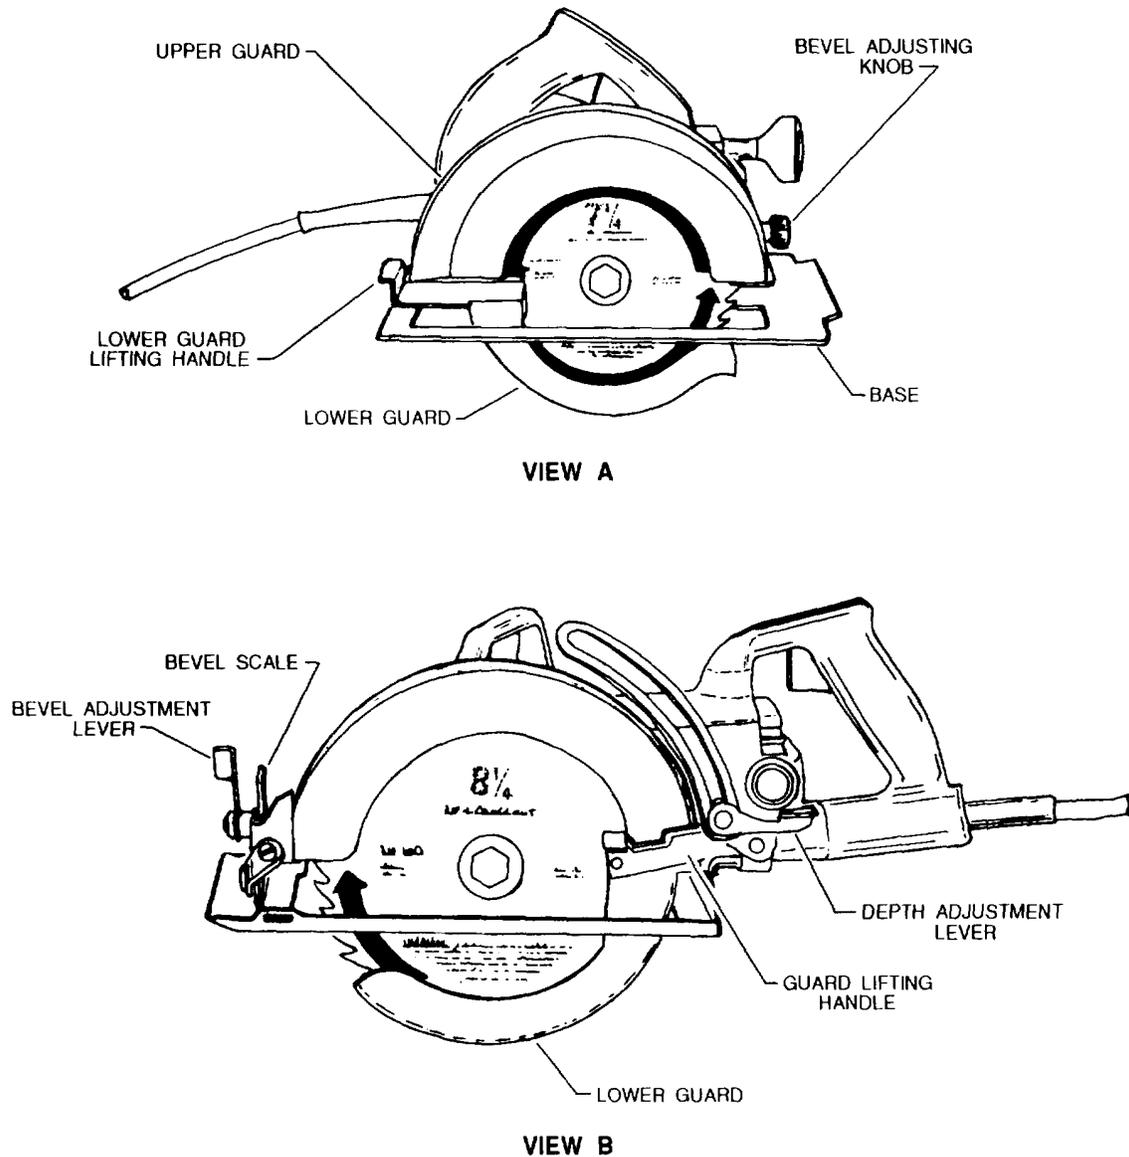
Side-drive (view A) and worm-drive (view B) circular saws
